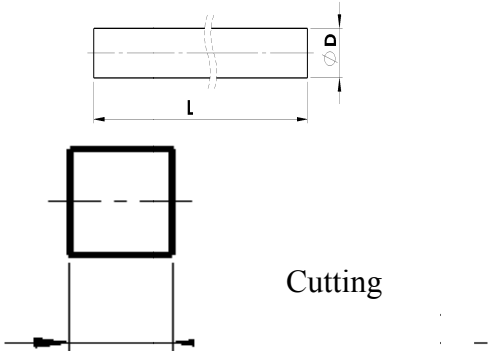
Dimensions of the semi-finished part used at the extrusion of the steel “Tube”.
